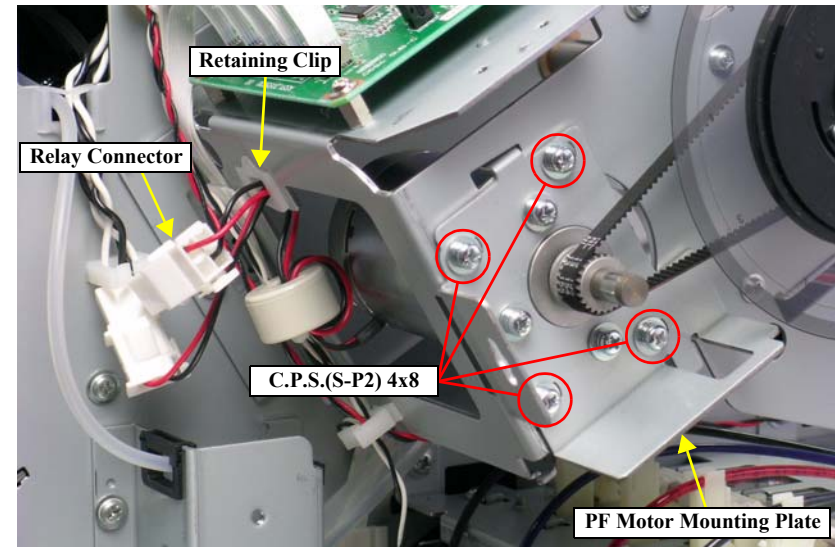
Screws Securing the PF Motor Mounting Plate
